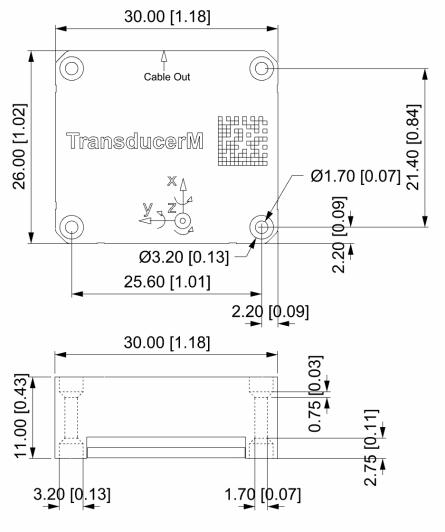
TransducerM TM421 Mechanical Drawing and Axis Definition
